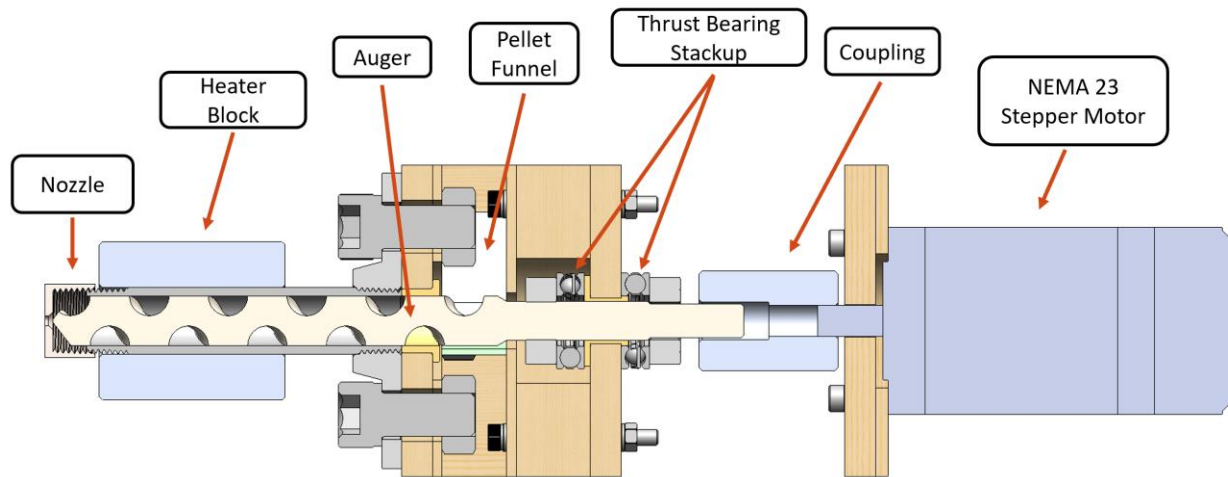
Cross sectional view of filament extruder assembly with relevant labels.
